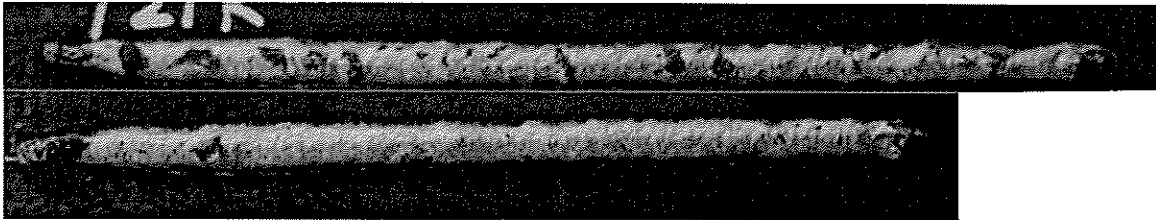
Photo of beads-on-plate welded with closed-loop arc bubble control
